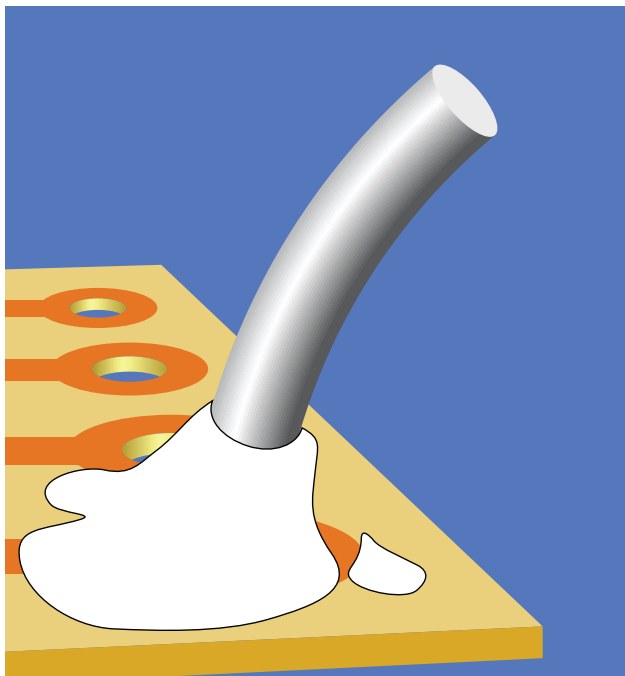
If you use too much solder, it will end up in places where you don't want it.
